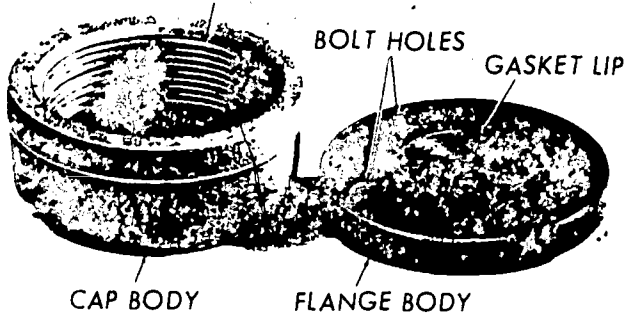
Typical four-hole flange and 3-inch pipe cap.
